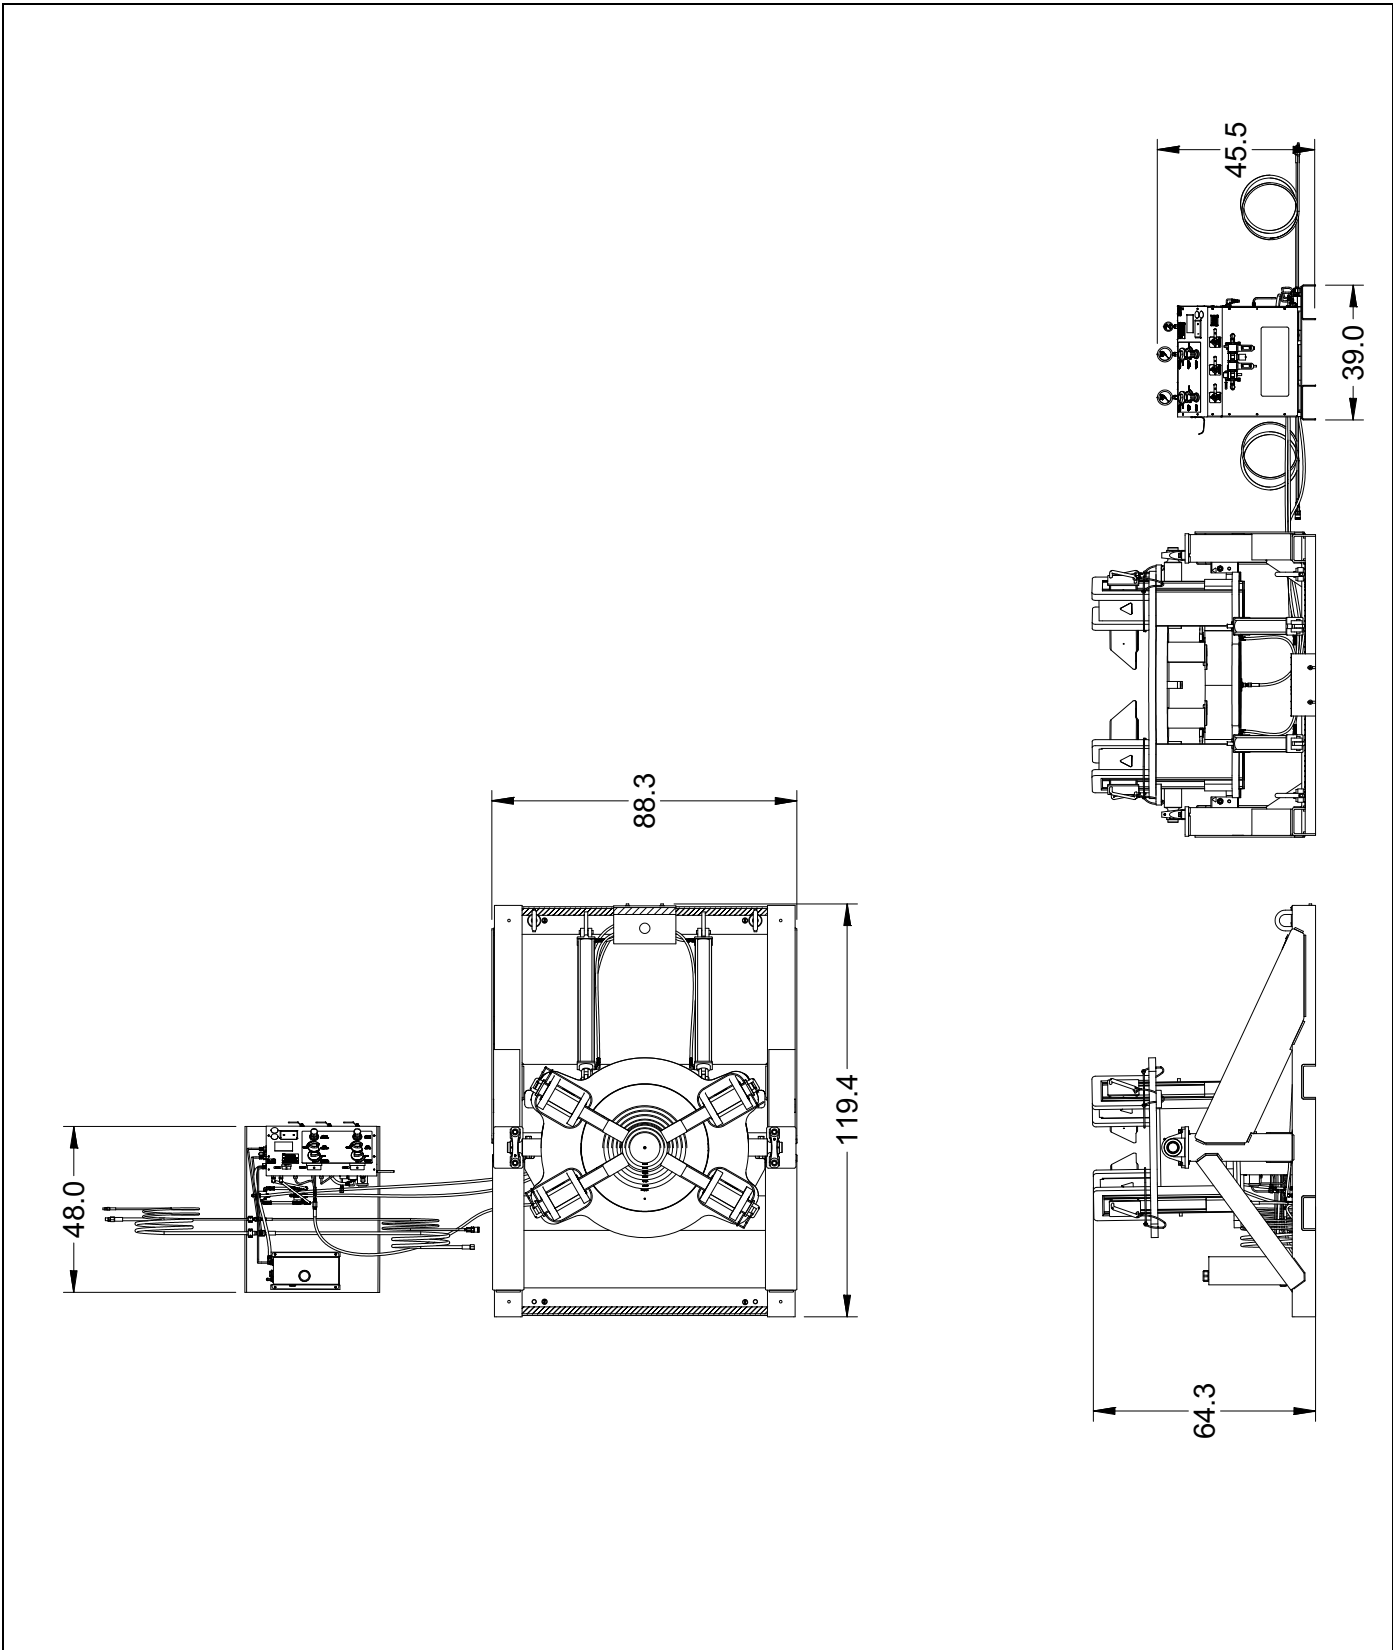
UFV-24-300T CLAMP FIXTURE DIMENSIONS
